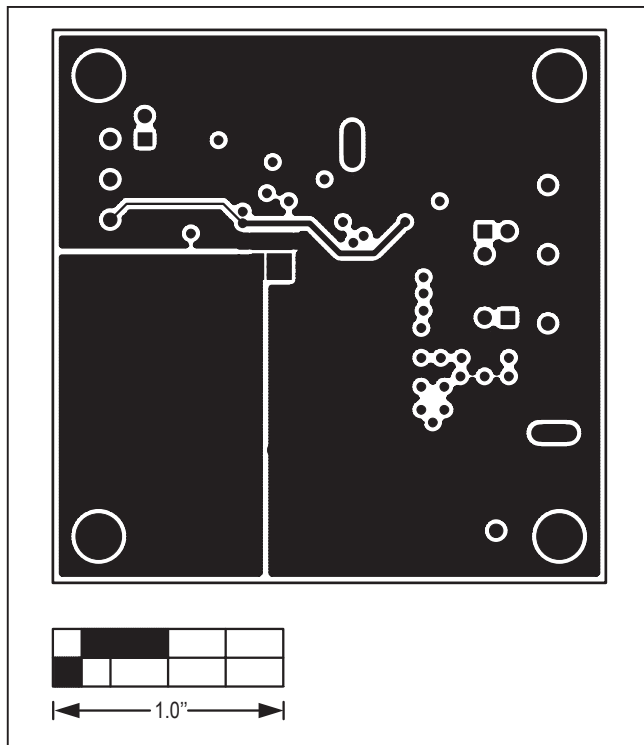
MAX17016 EV Kit PCB Layout—GND Layer 3
